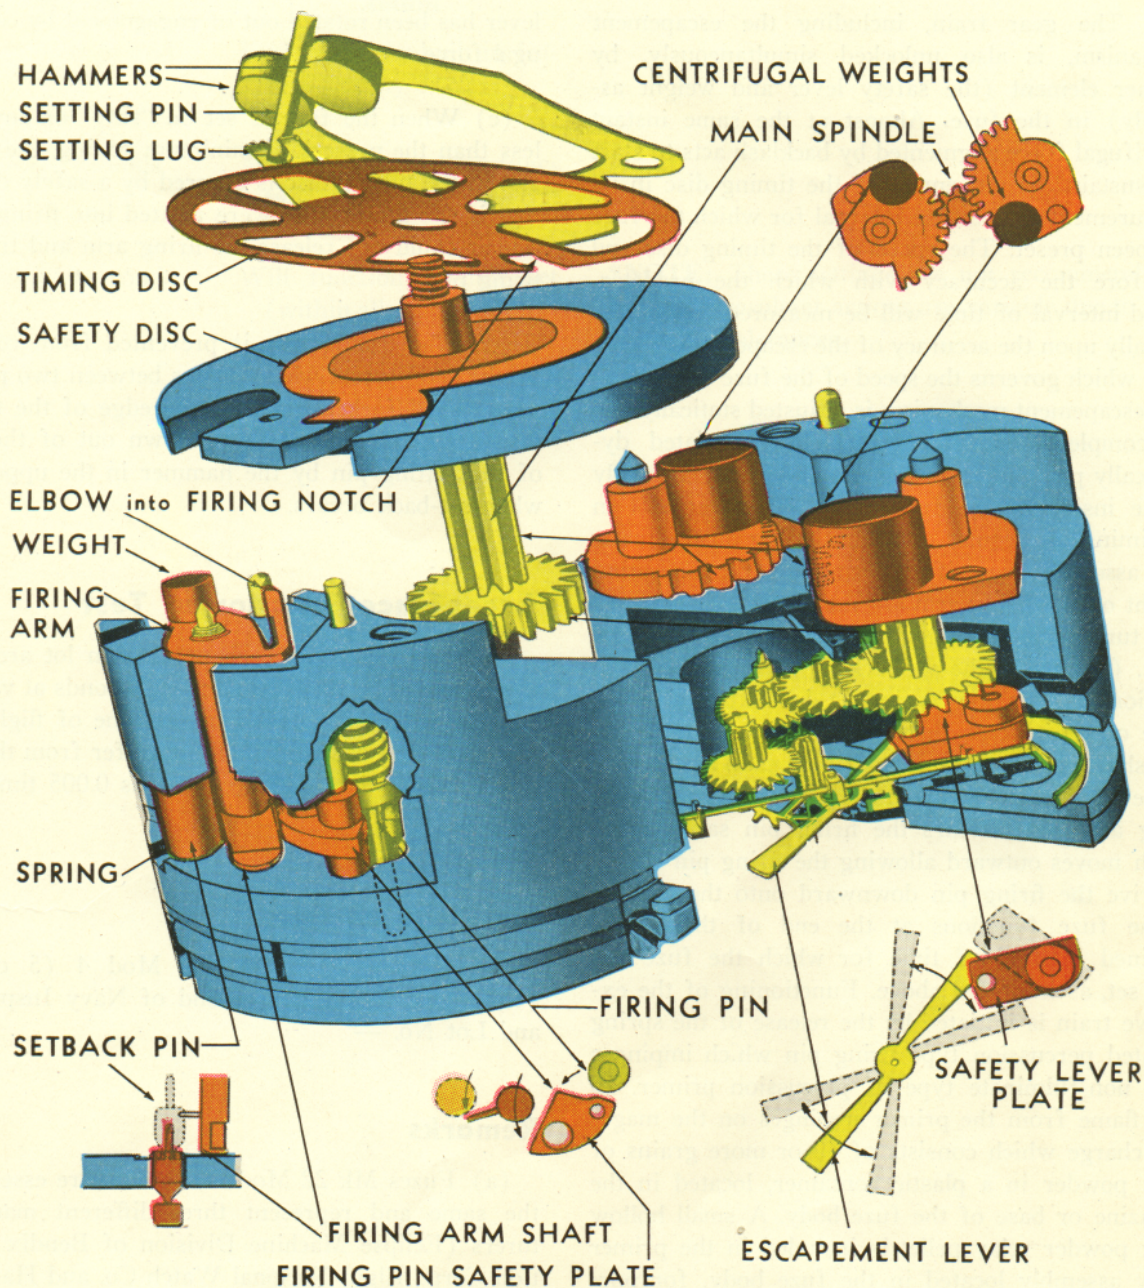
Mechanical Time Fuze Mk 22 Mods 4, 5 and 6—Exploded View
